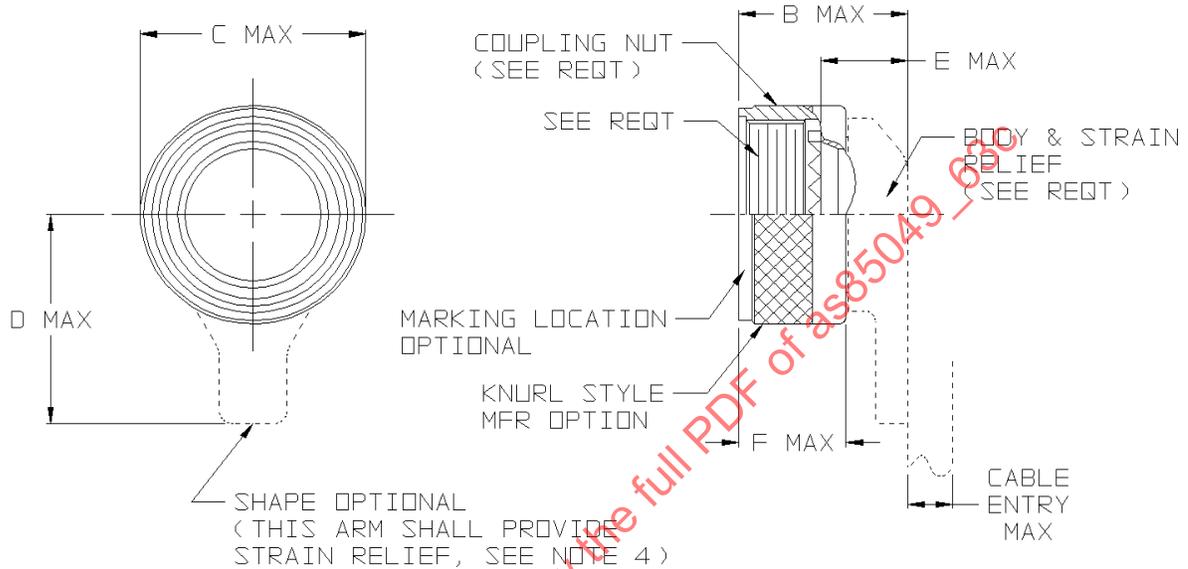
DIMENSIONS AND CONFIGURATION (SELF-LOCKING AND NON-SELF-LOCKING)
